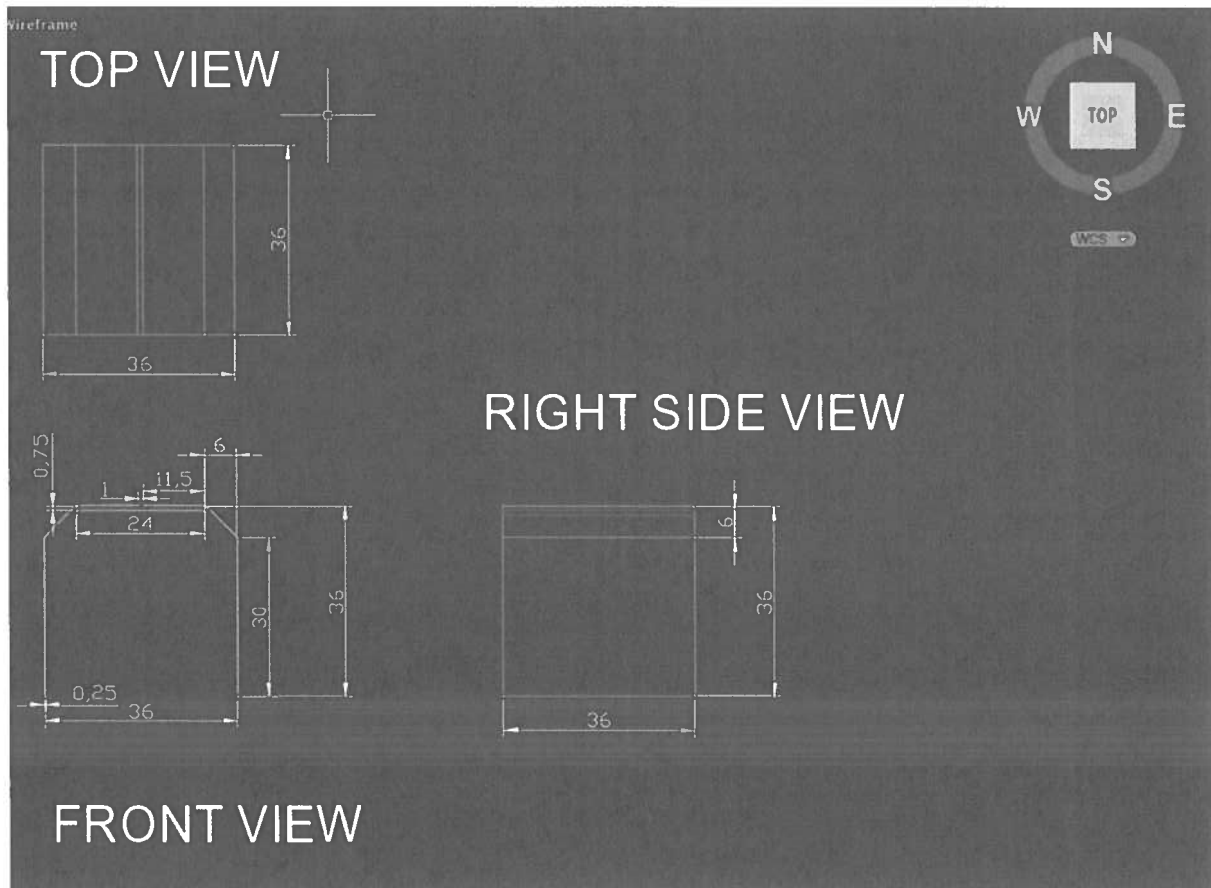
Top, Front, and Right Side View illustrating dimensions of aluminum panels (inches)
